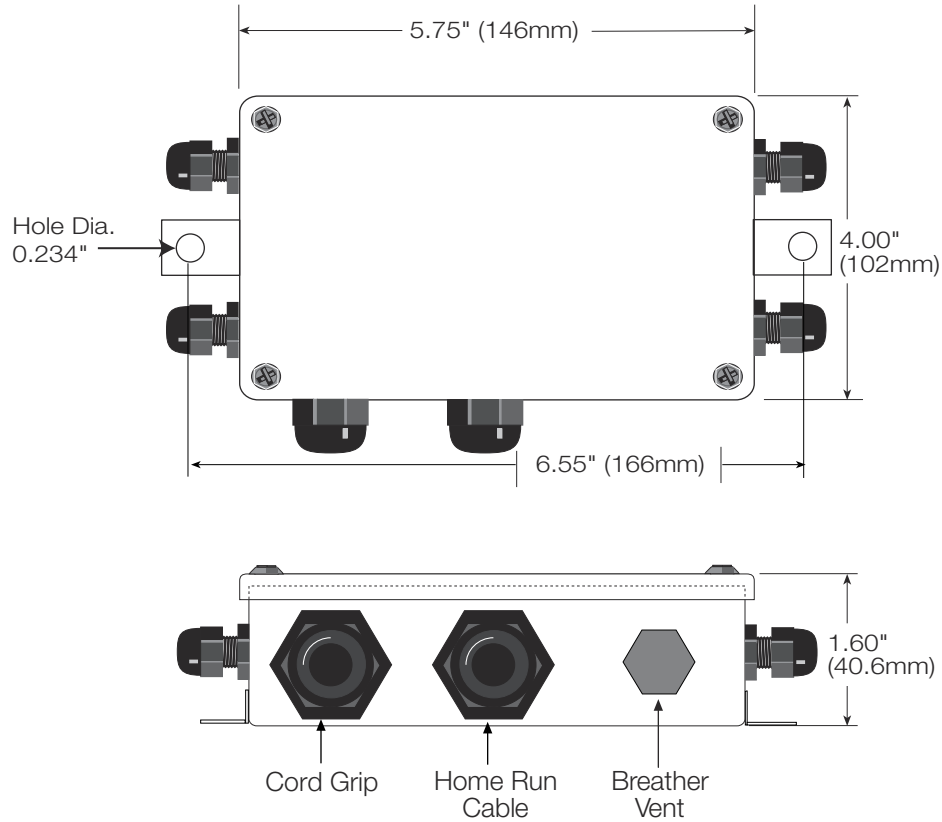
JB4ES and JB4SS Enclosure Dimensions
